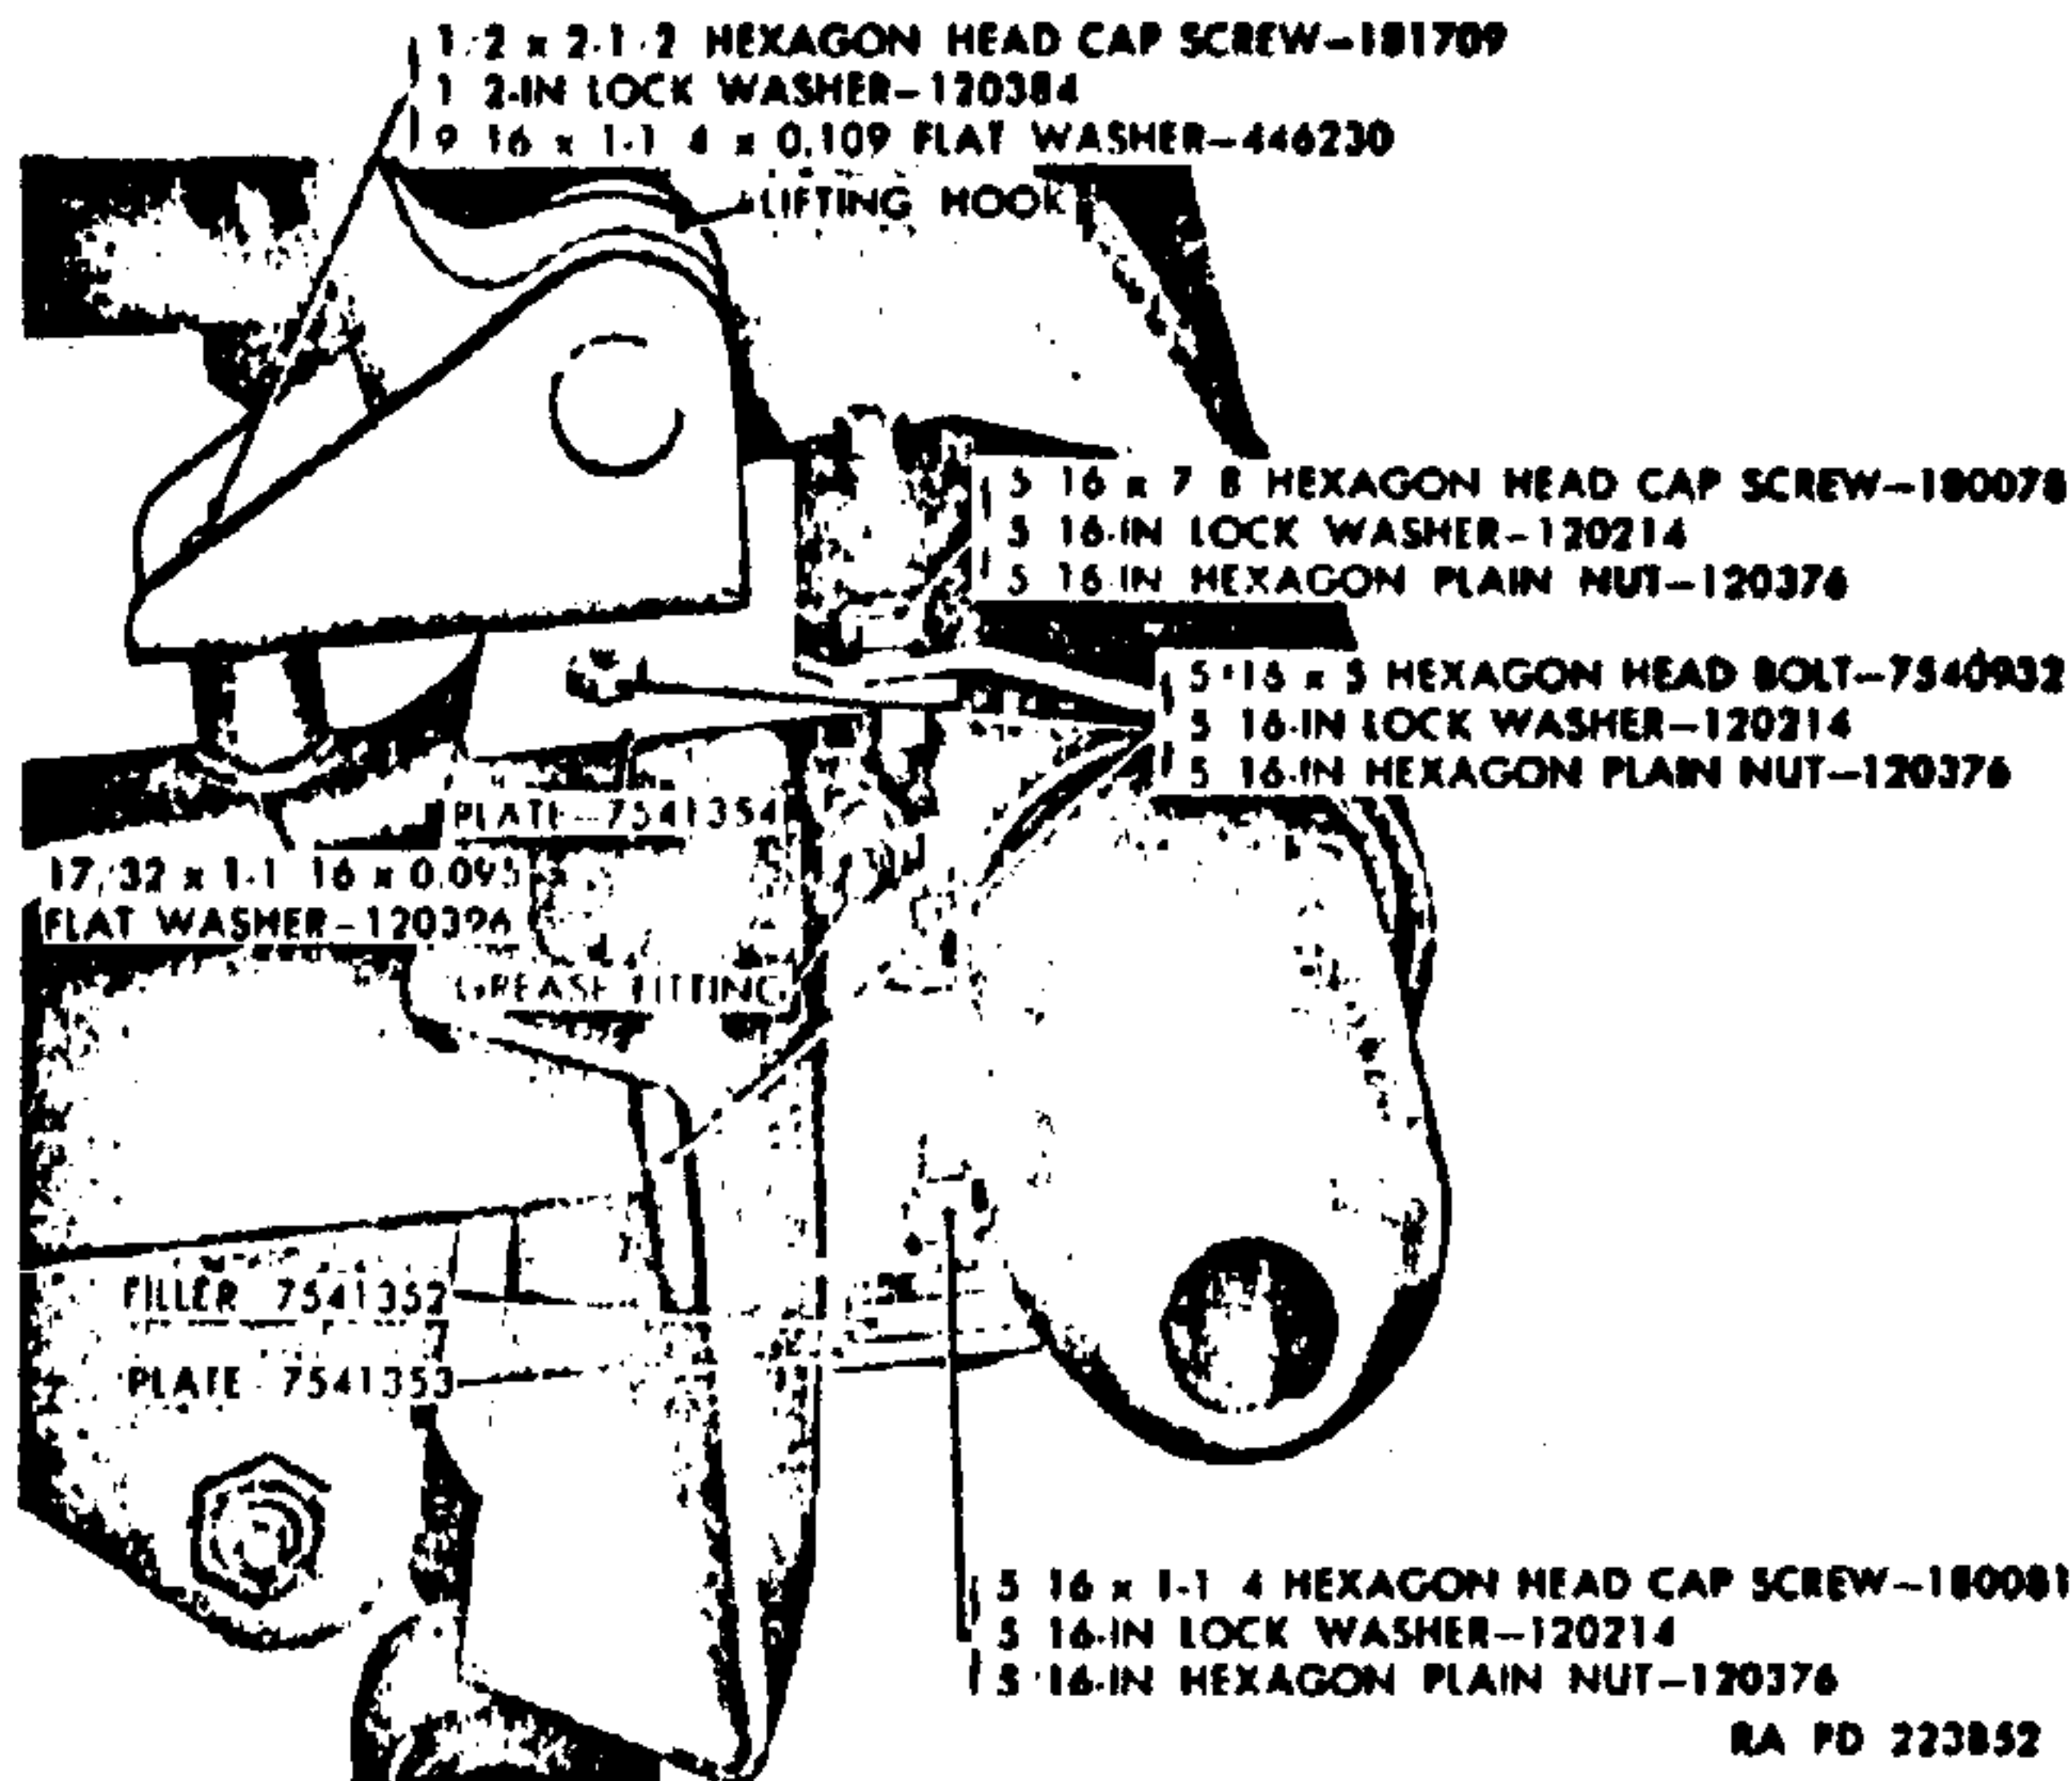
Tow bar and frame bracket assembly WO-7927-A installed.
